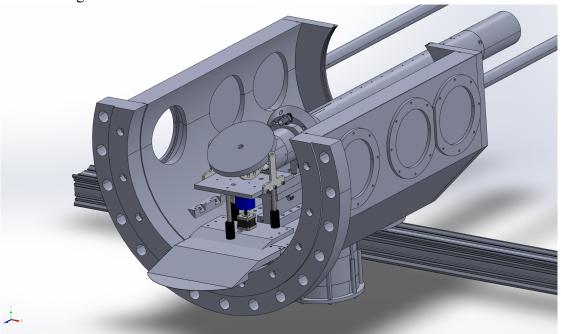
Current Assembly Lacking Space in the Test Section
